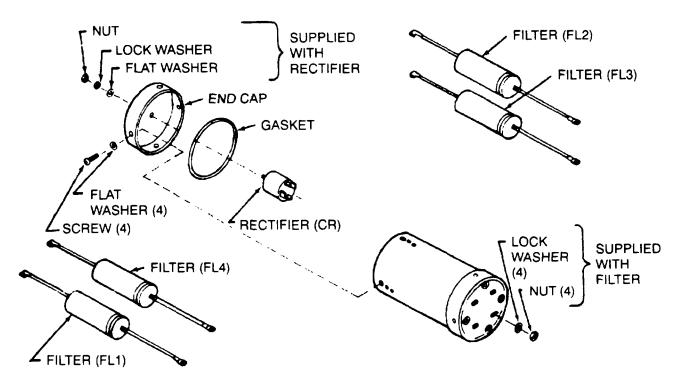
RFI Filter (A1) Assembly/Disassembly
